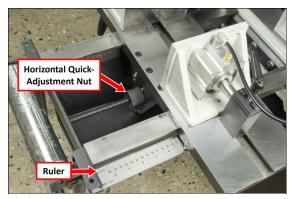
Horizontal quick-adjustment nut. The horizontal quick-adjustment nut controls the length to which the infeed table moves.
